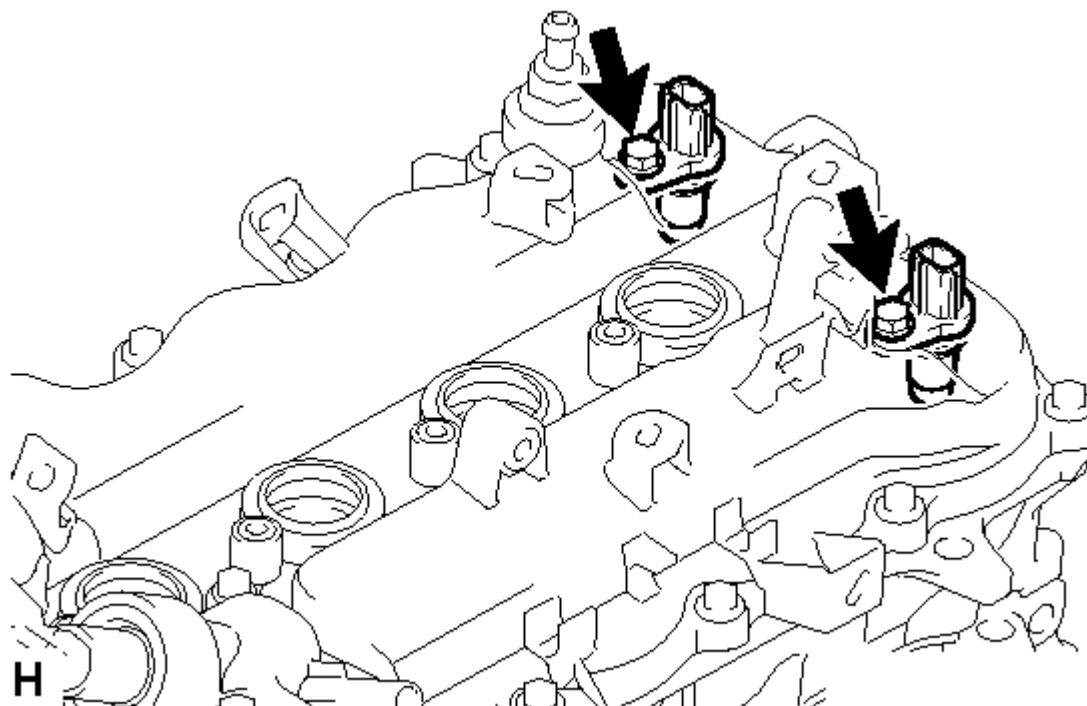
Identifying No. 1 Crankshaft Position Sensors Bolts
